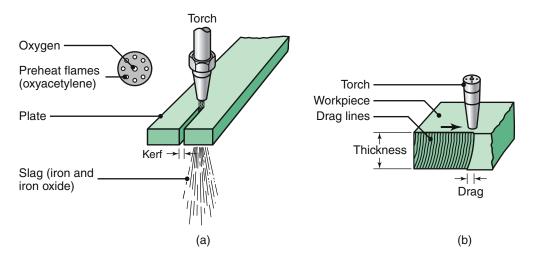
(a) Flame cutting of a steel plate with an oxyacetylene torch, and a cross section of the torch nozzle. (b) Cross section of a flame-cut plate, showing drag lines.
